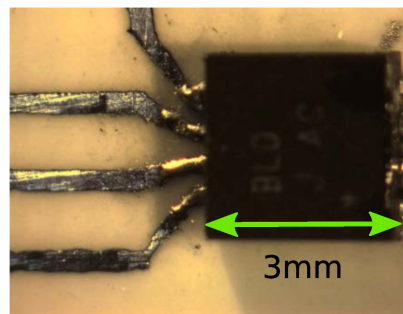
Circuit traces for a TDFN8 IC package fabricated with inkjet printing masking.
